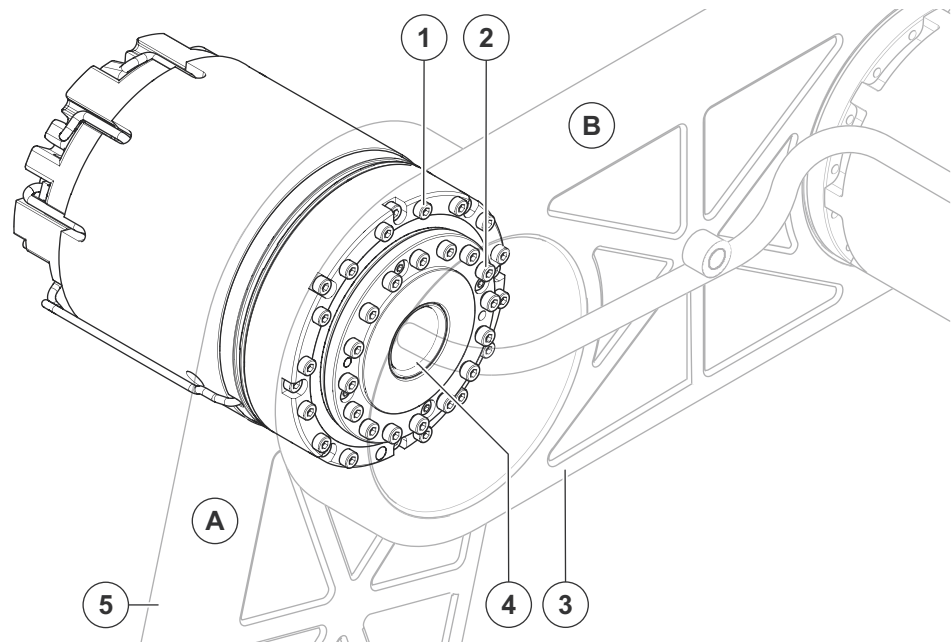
Screw connection on housing parts A and B (example illustration)
